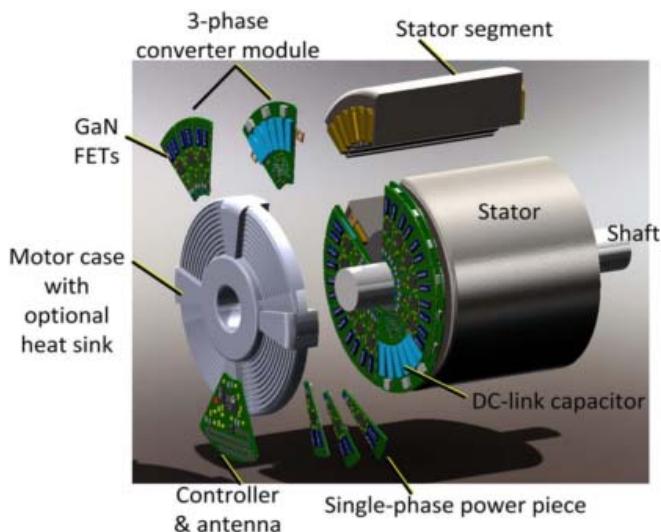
Three-dimensional illustration of the Integrated Modular Motor Drive (IMMD) [53]
